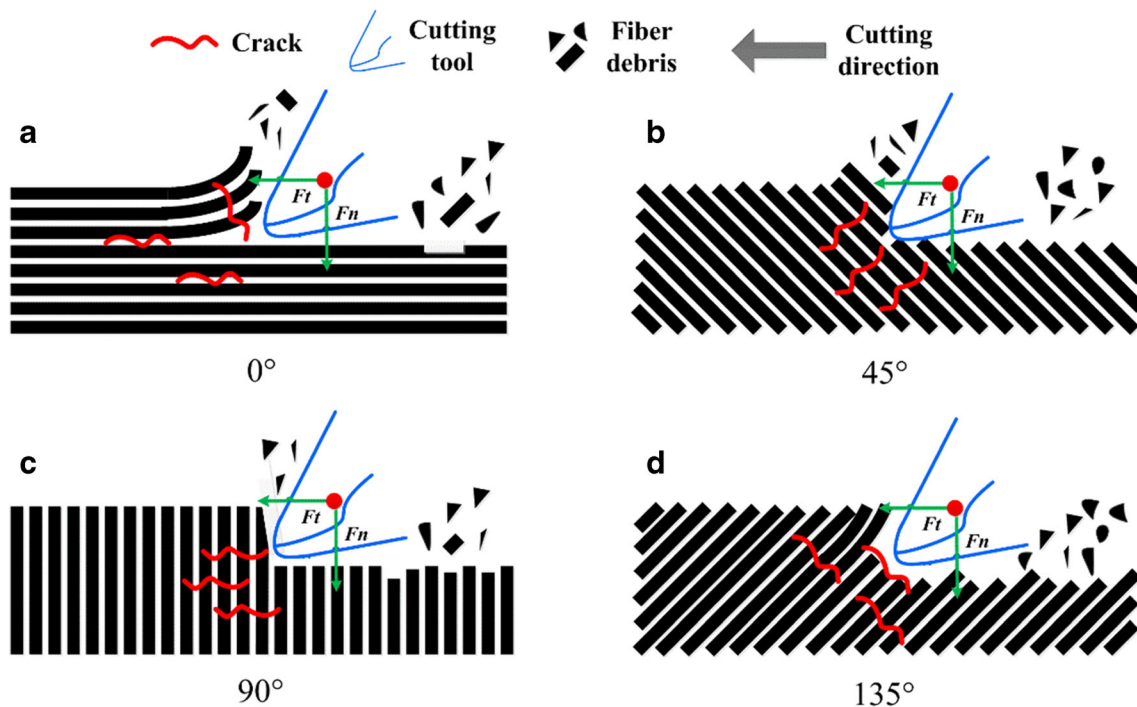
Material removal mechanism in high-speed milling of CFRP
